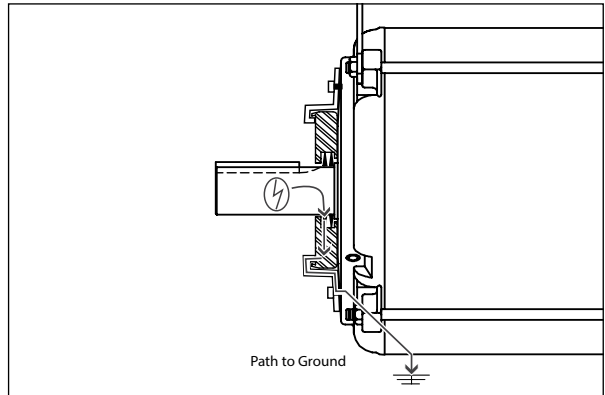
Motor Shaft Grounding Ring Path to Ground
